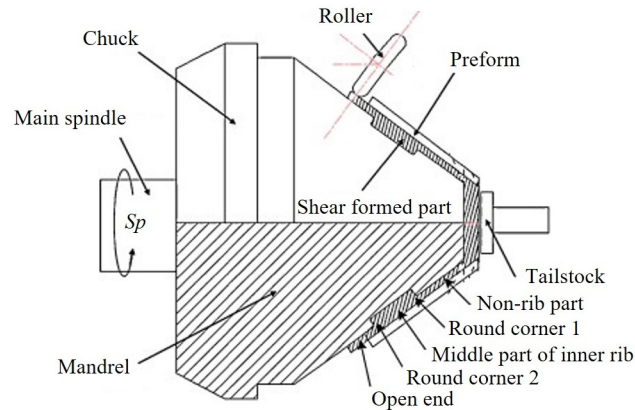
Shear forming of conical parts with transverse inner rib (Ma et al., 2010) – reproduced with permission from Elsevier.
